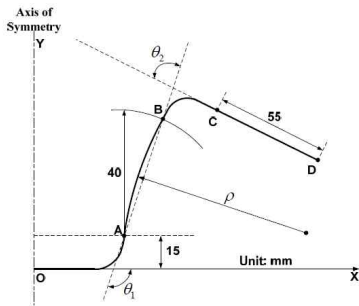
Measuring method of the springback amounts in the U-draw bending process⁽⁸⁾
